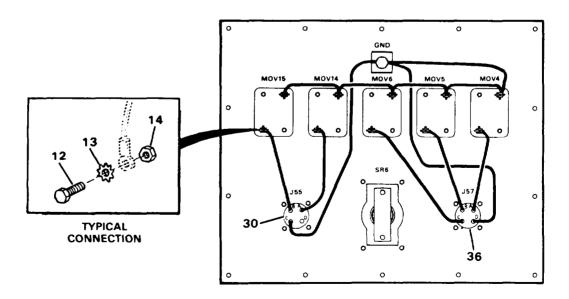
Raw Water Pump External Electrical Panel Assembly (sheet 3 of 3) Connections
